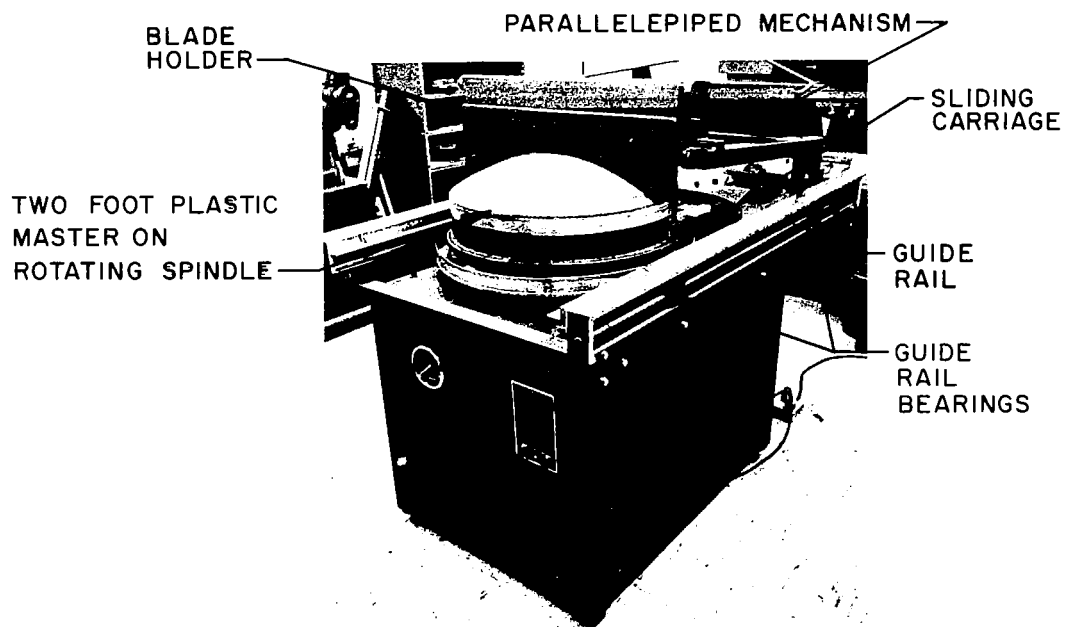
BLADE GRINDING ASSEMBLY WITH
